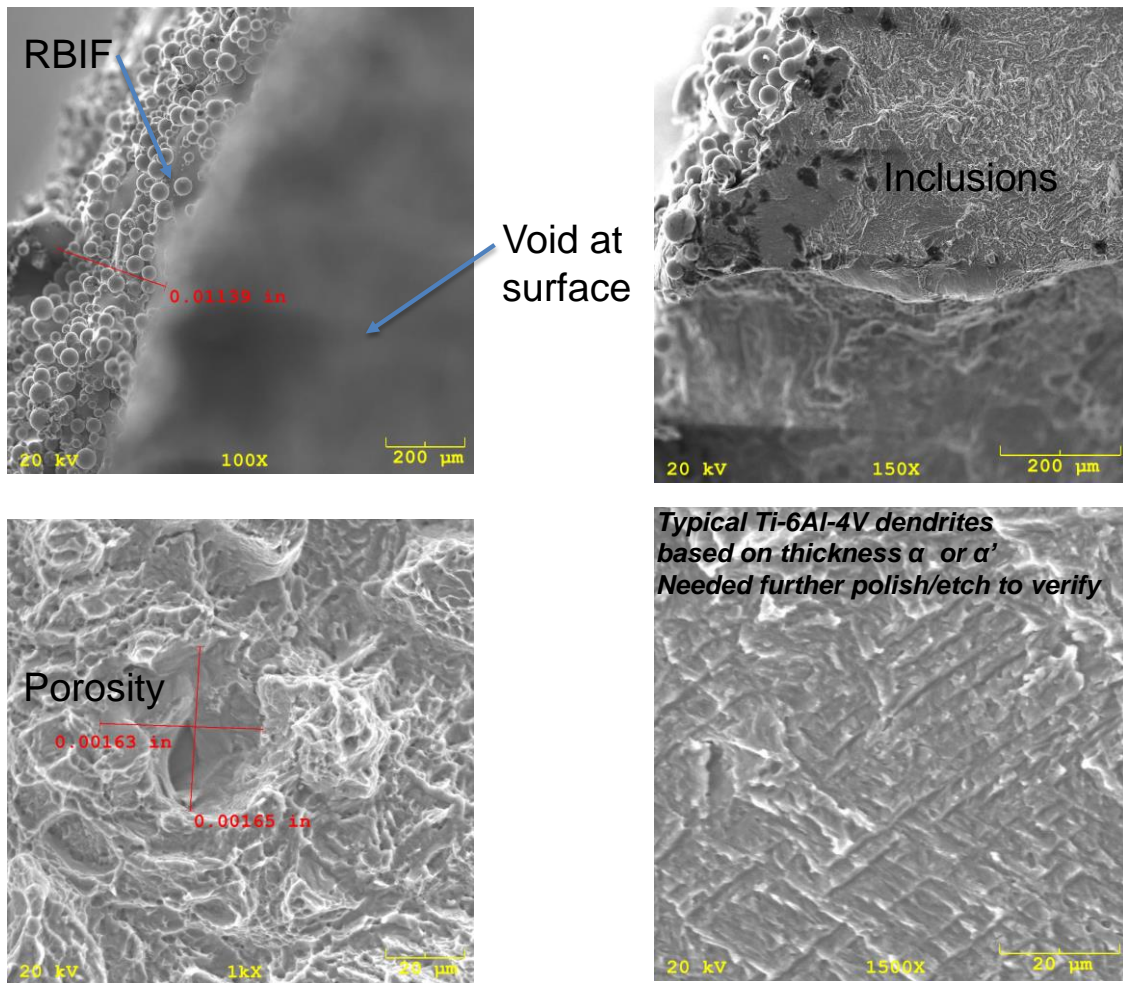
SEM photographs of fracture surface of RBIF Specimen 3
